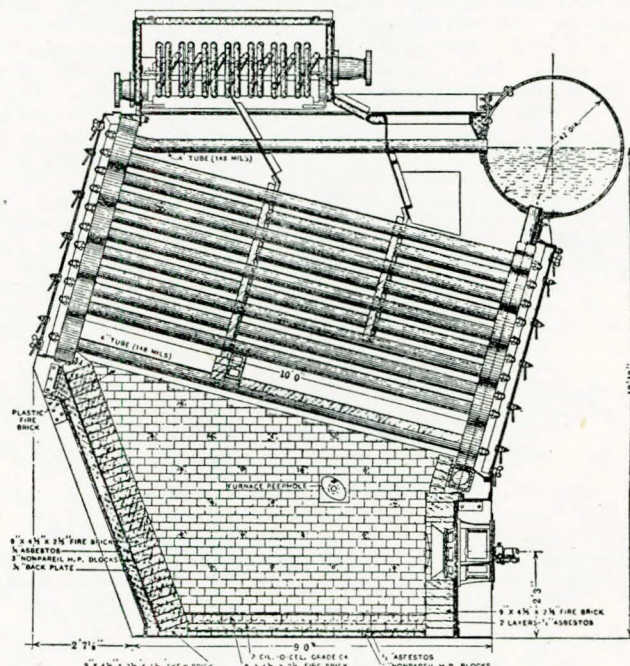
Longitudinal section of 4-in. tube header-type boiler with superheater.
